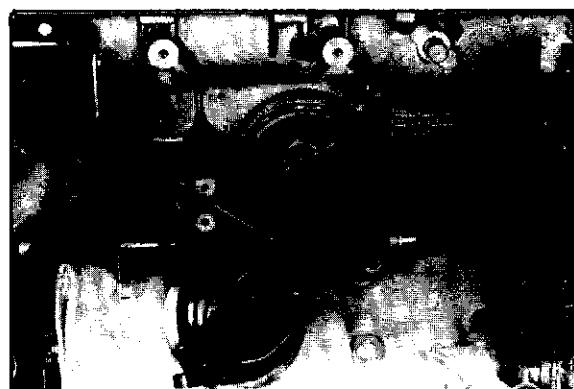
CHECK and CLEAN GEARS and BEARING
